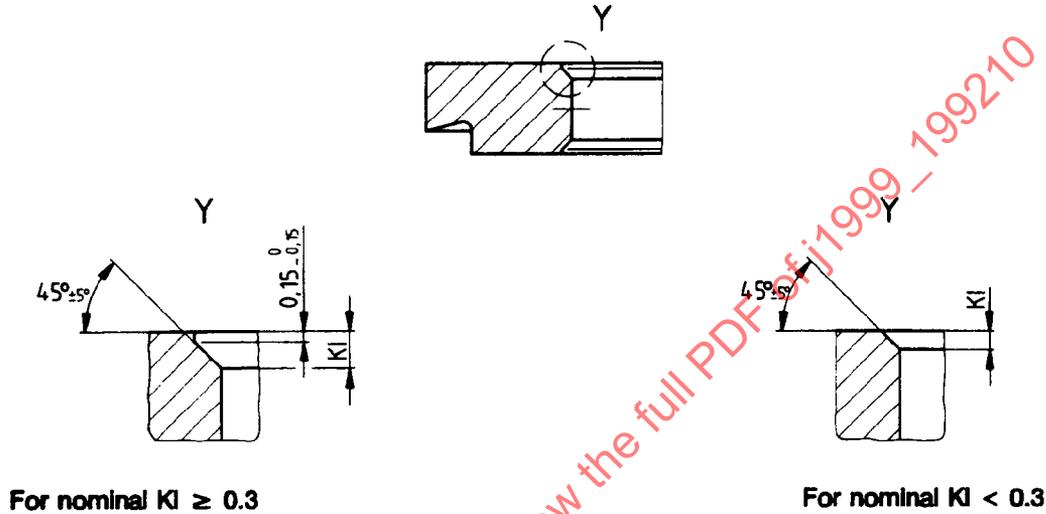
INSIDE CHAMFERED EDGES (KI)
